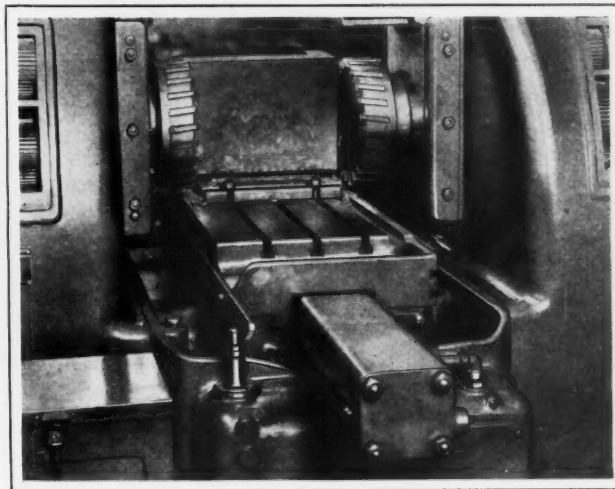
Cam Arrangement for Automatically Controlling Hydraulic Table Feed
